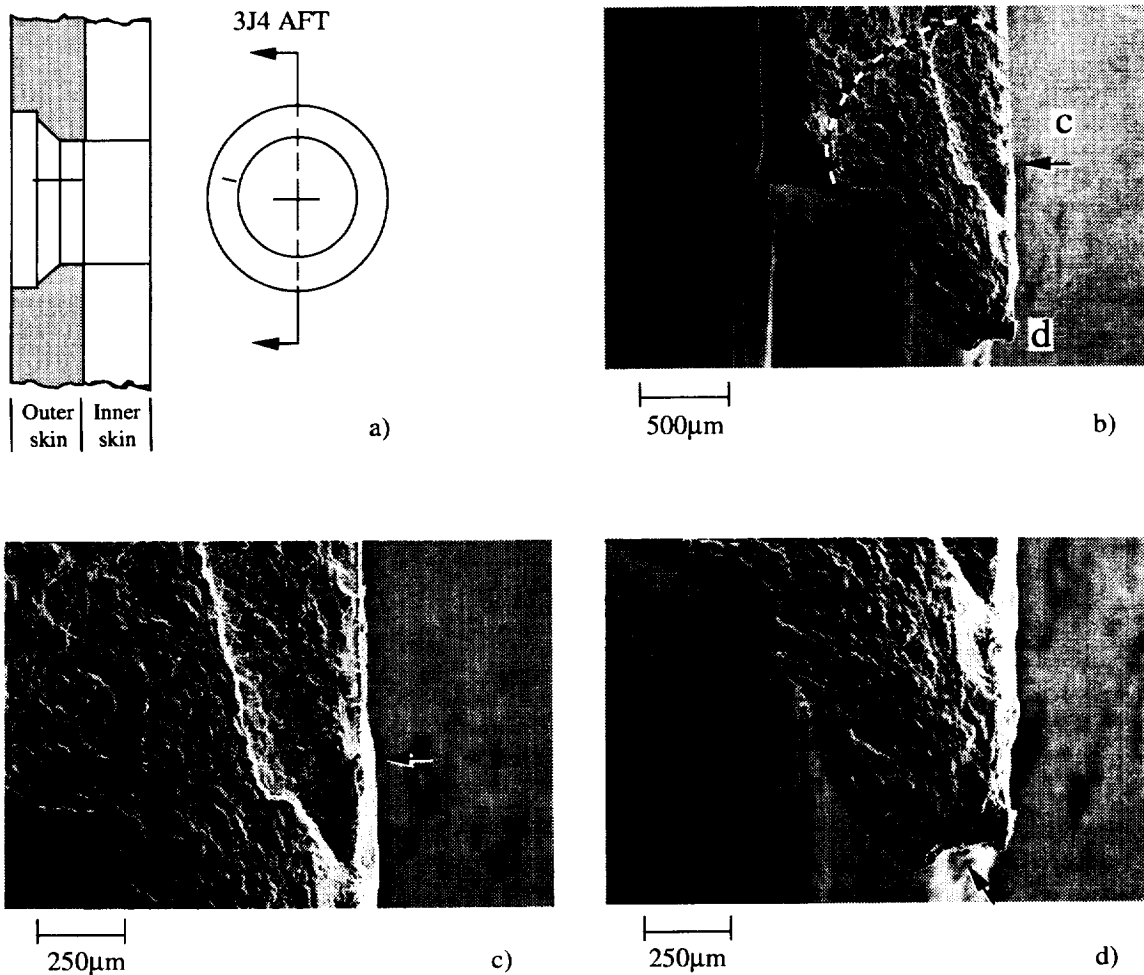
a) The schematic shows the rivet hole 3J4 configuration and the location of the outer skin fatigue crack oriented in the aft direction and about the 10 o'clock position. b) The SEM micrograph shows the fatigue crack at the rivet hole (bottom). The micrograph reveals that cracking occurred along two fracture planes ("c" and "d"). An arrow marks the likely crack initiation region for crack "c" along the faying surface. The dashed line marks the fatigue crack front. c) The SEM micrograph shows the fatigue crack surface at region "c". The arrow marks the likely crack initiation site along the faying surface. d) The SEM micrograph shows the fatigue crack surface at the rivet hole shank region "d" in Figure 9.16.b. The arrow marks the likely region of crack initiation.
